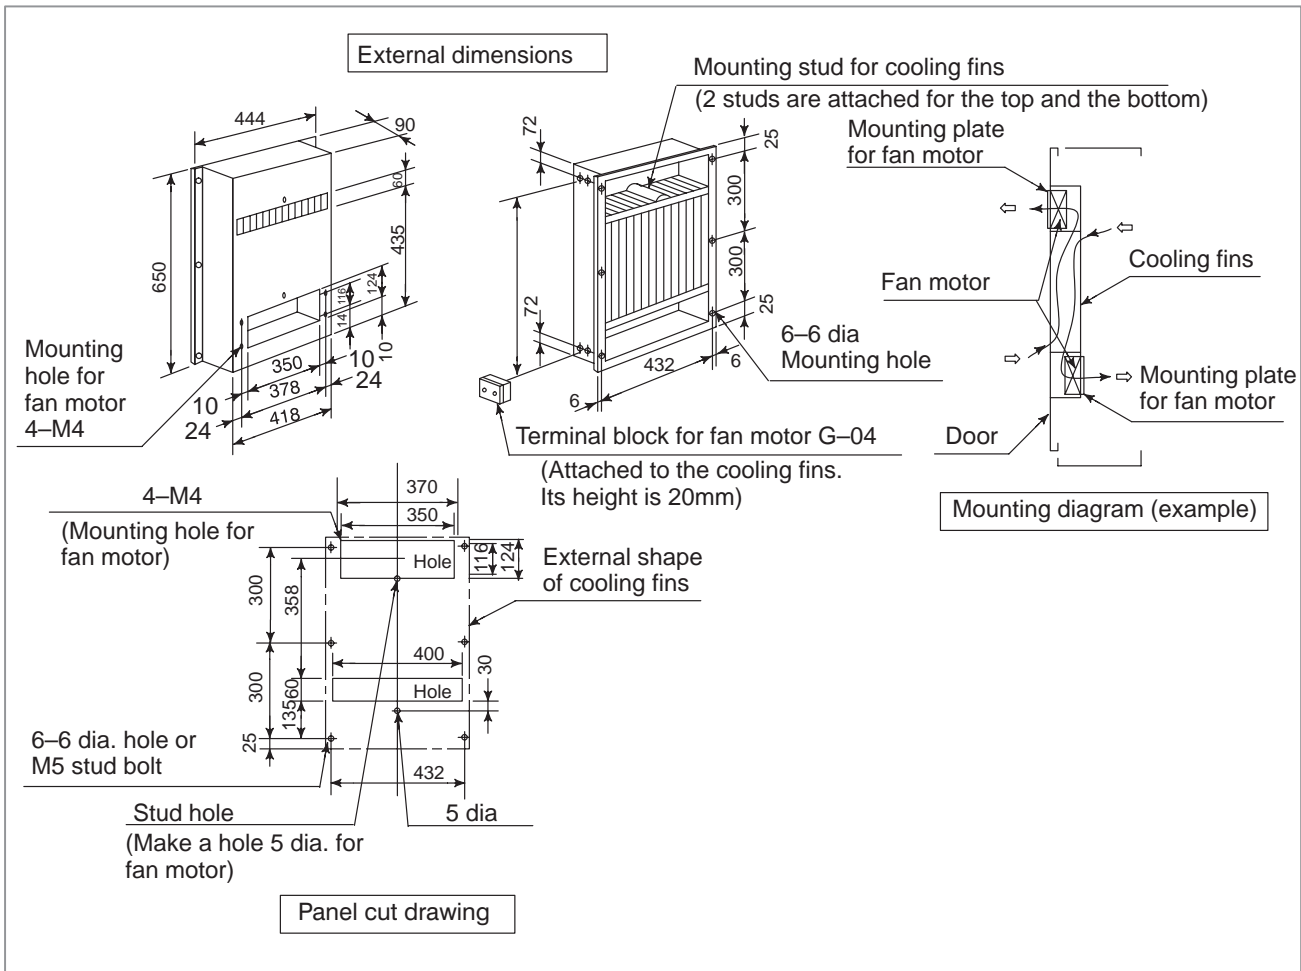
(d) External dimension and mounting method of cooling fin B (A02B-0053-K304)
